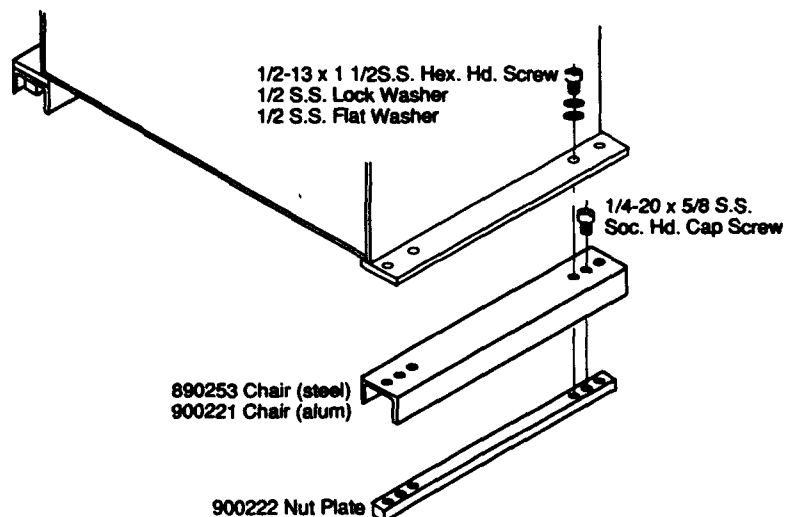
Mounting of SIU to deck (1 in. = 2.54 cm).
